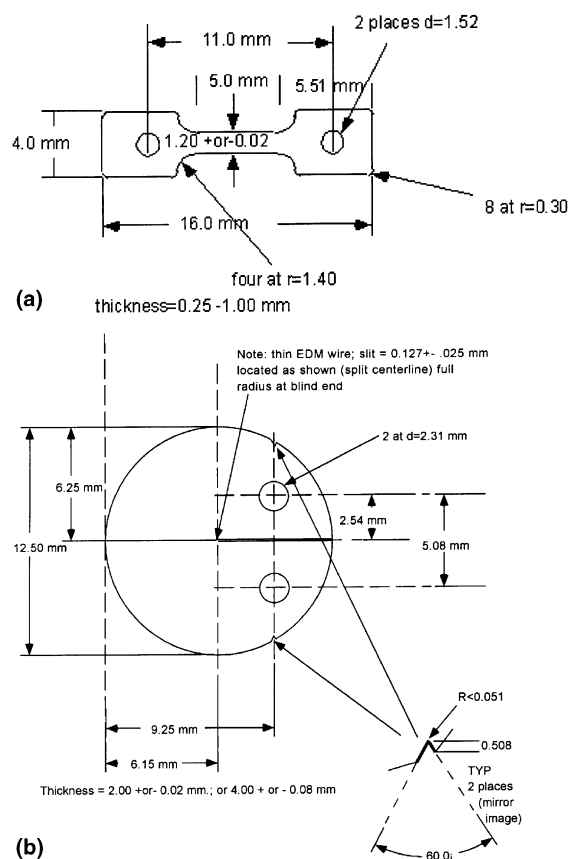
Schematic showing (a) the dimensions of the S-1 tensile specimen and (b) the dimensions of the sub-size disk compact tension specimen used for measuring the mechanical properties of materials after irradiation in a spallation environment.
